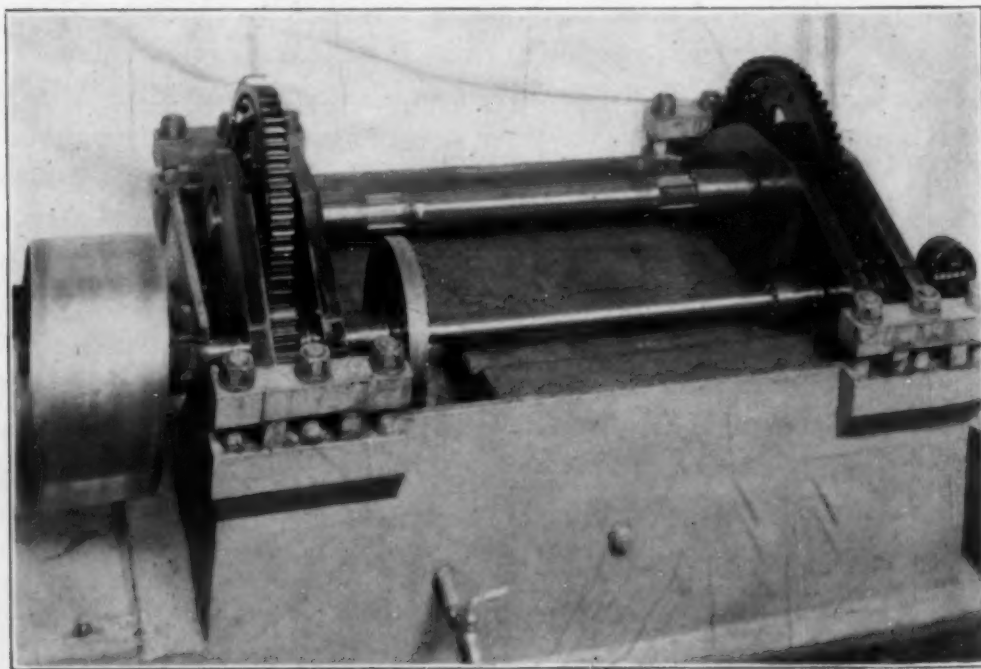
Gear Testing Dynamometer for 4-Pitch Gears.
